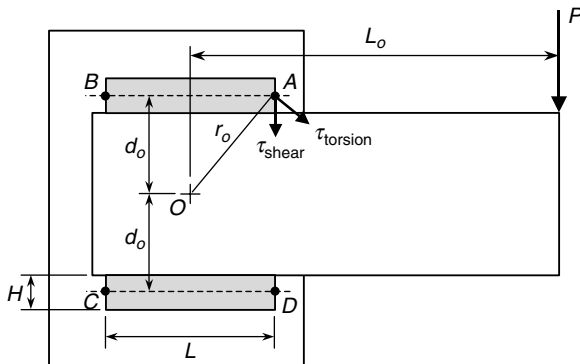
Fillet weld geometry for torsion.
